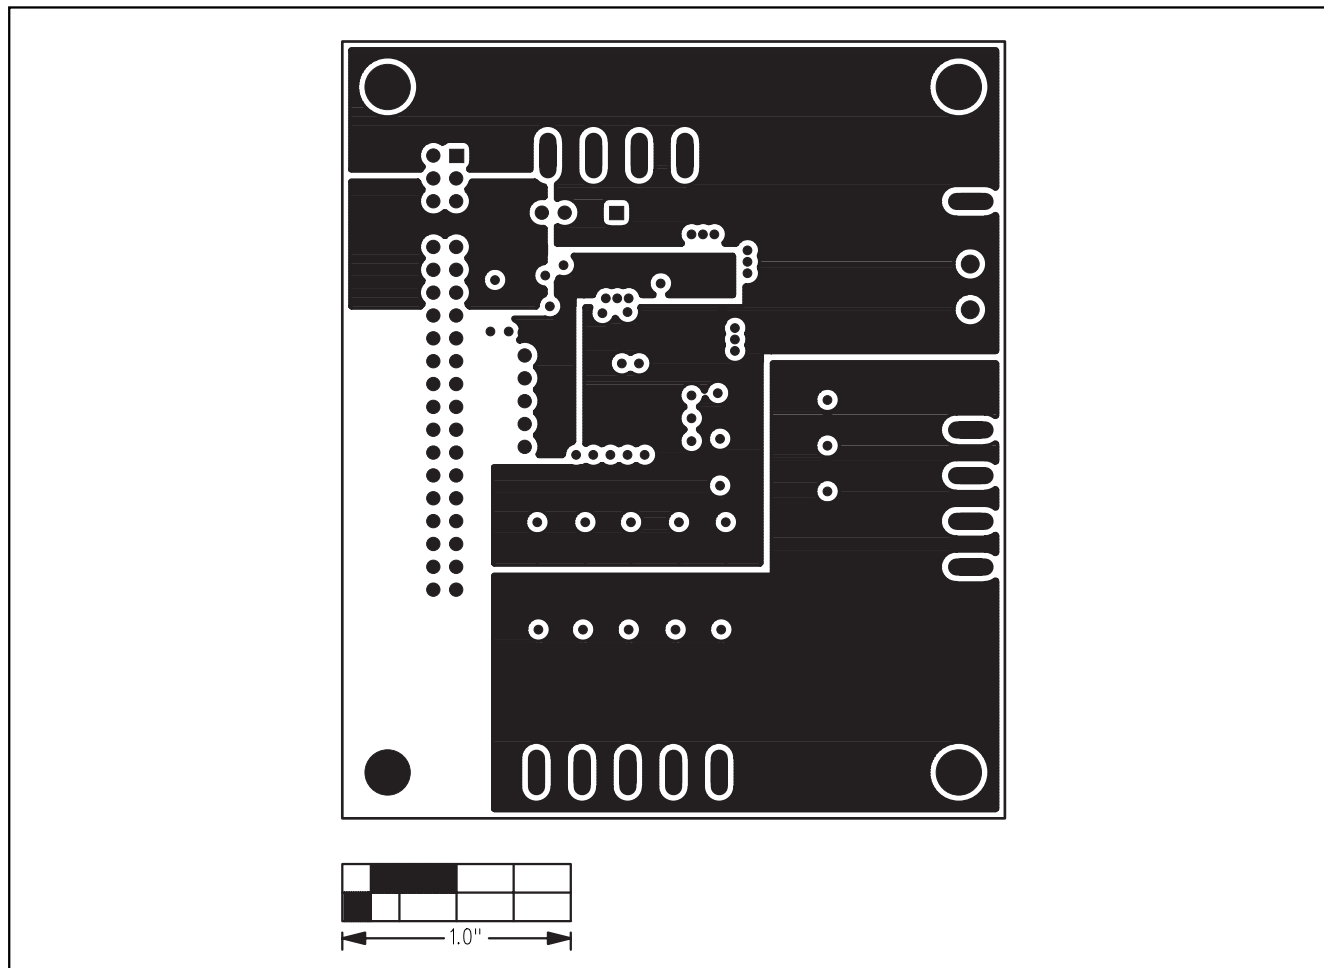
MAX1168 EV Kit PC Board Layout—Inner Layer 3 (VDD)
